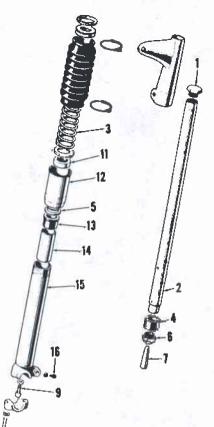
Exploded view of front suspension used from serial number DC5825 to DU66245. On some models, restrictor valve may be type shown in Fig. TM4-16. Refer to Fig. TM4-14 for leaend.
